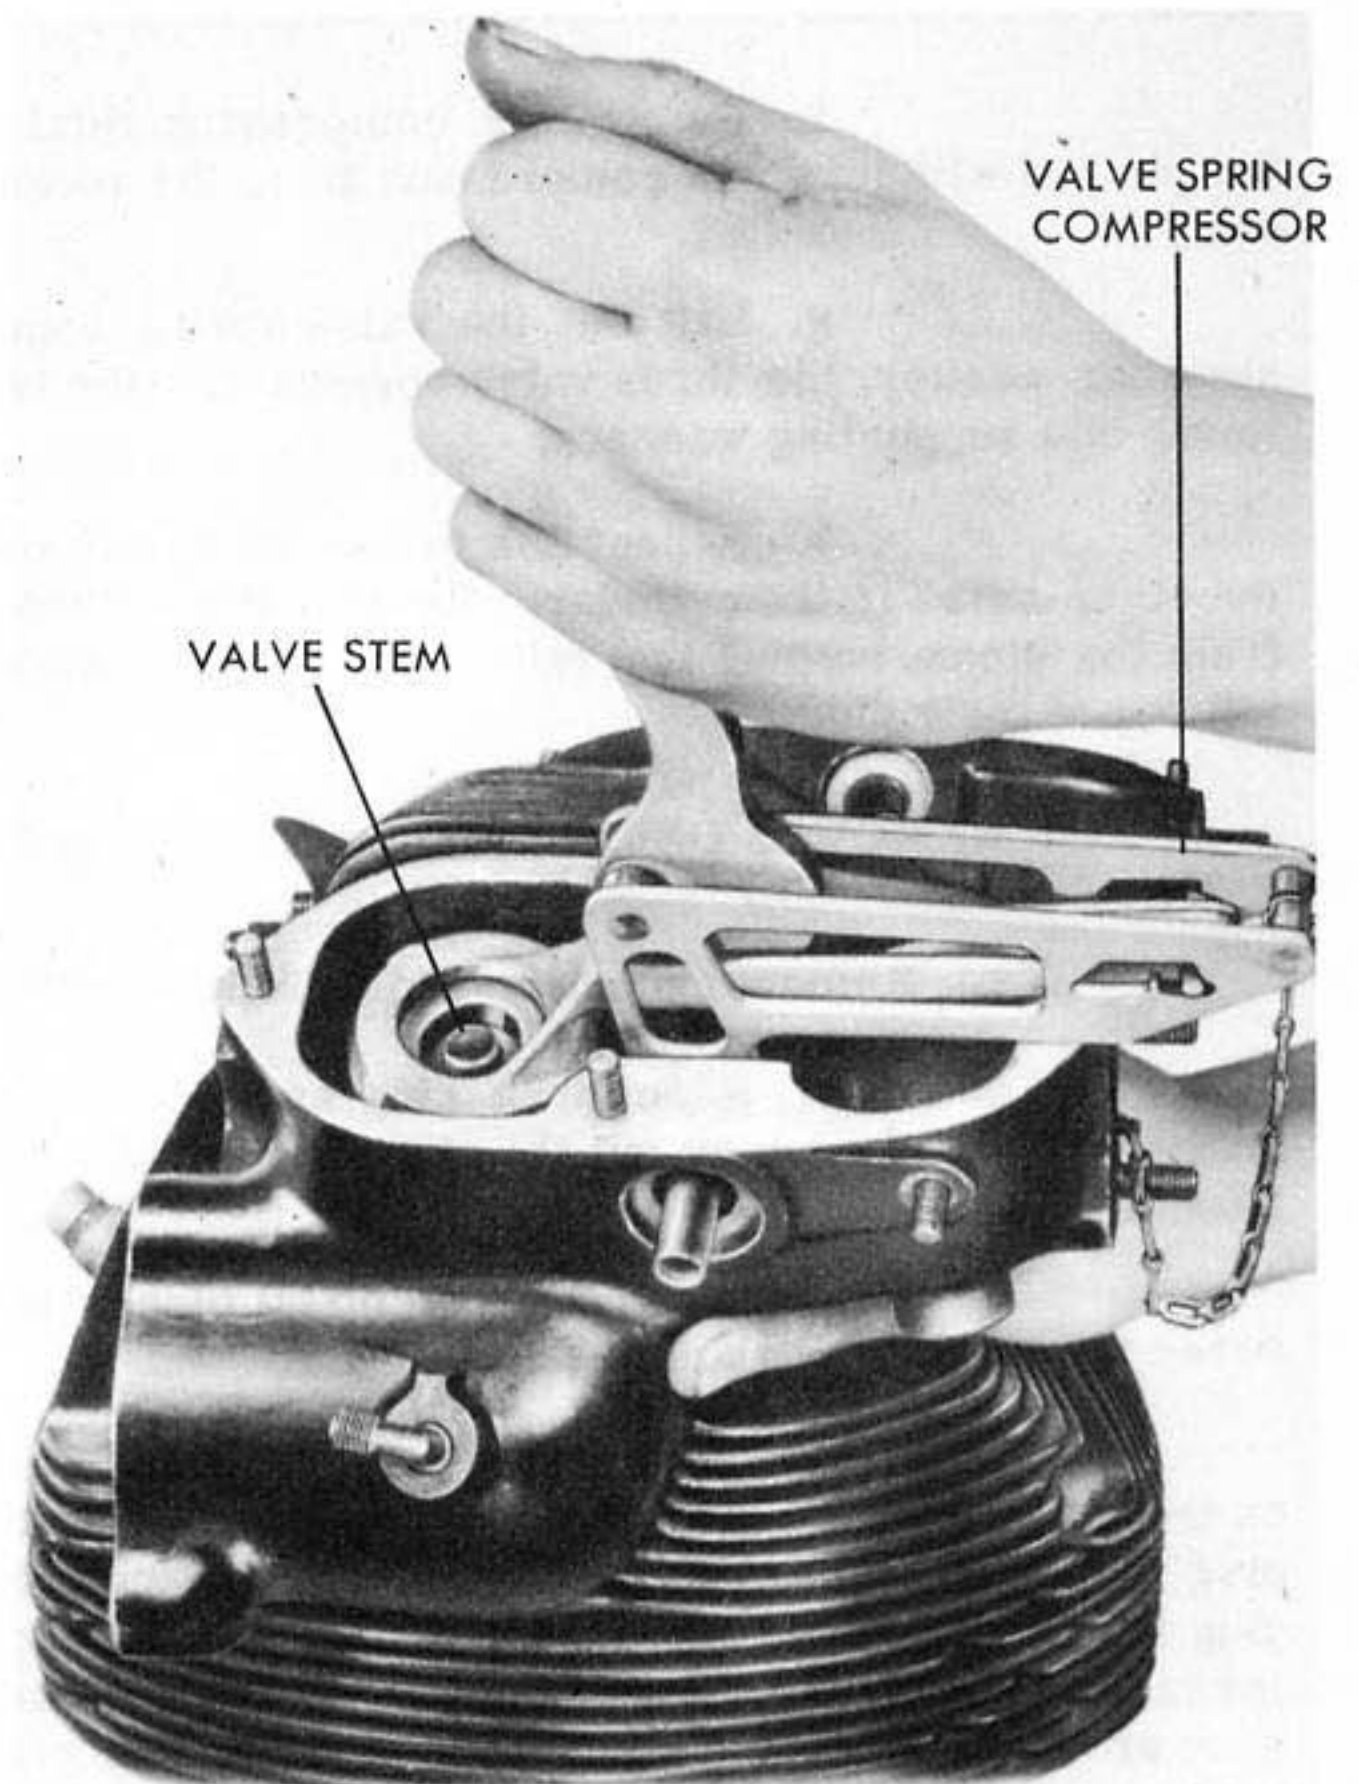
COMPRESSING VALVE SPRING FOR REMOVAL
